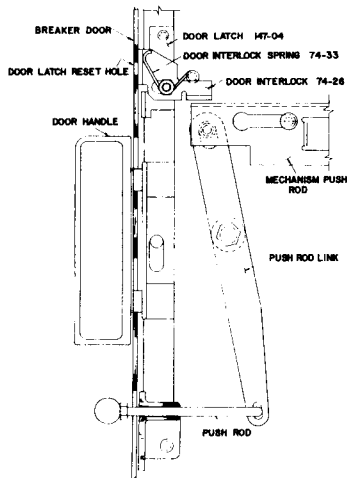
(0102C5208-0) Door Interlock With Red Knob In
